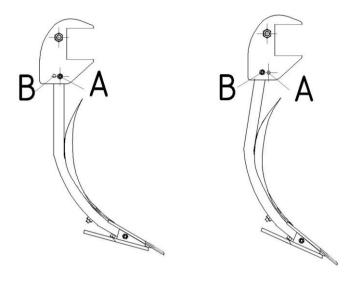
Adjustment of tooth tilt with the screw-type protection.
